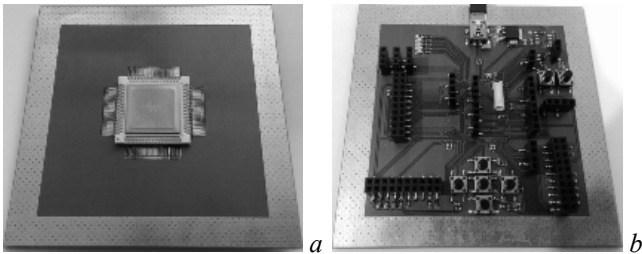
Front (a) and reverse (b) sides of the test PCB with IC.
